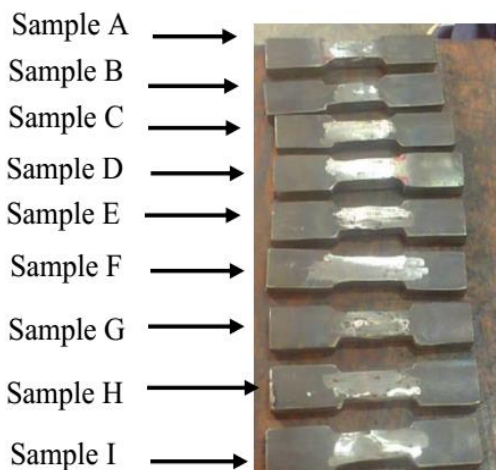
Tensile test specimens extracted from API 5L X46 weld coupons
